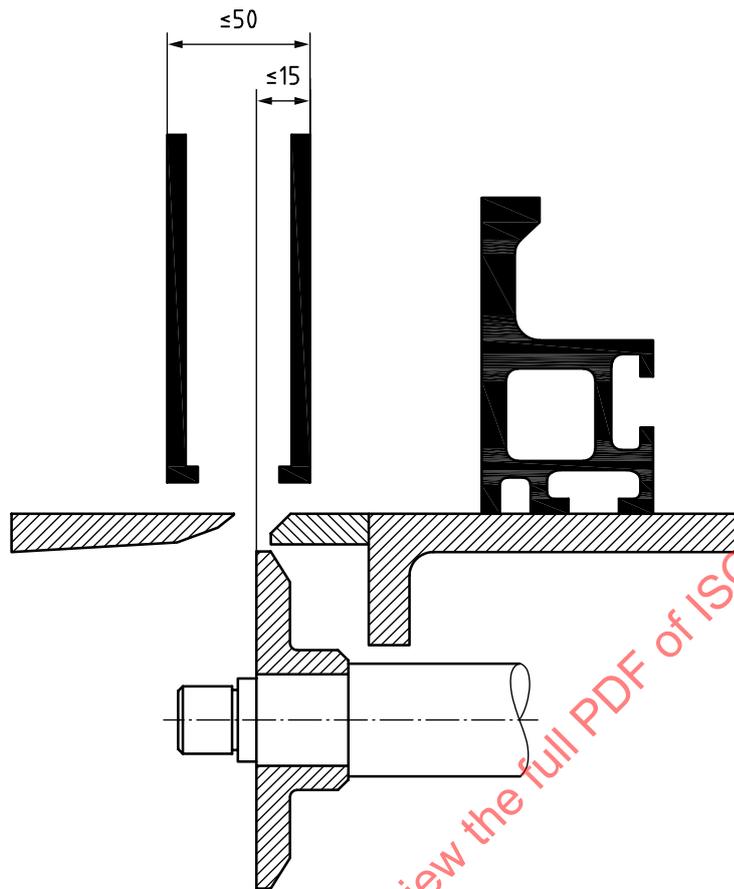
Dimensions of the “lead-in” at the front edge of saw blade guards mounted to the table separately from the riving knife
